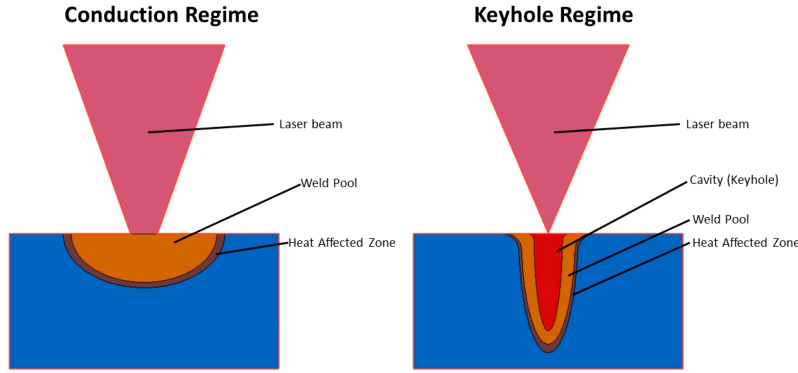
Conduction and keyhole mode laser welding. [30]
